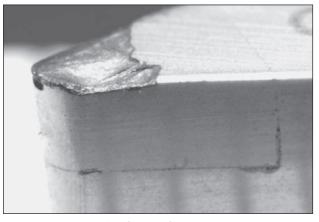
Cutting wedge fracture for $q = 0.3 \text{ mm}, f_2 = 0.09 \text{ mm}$
